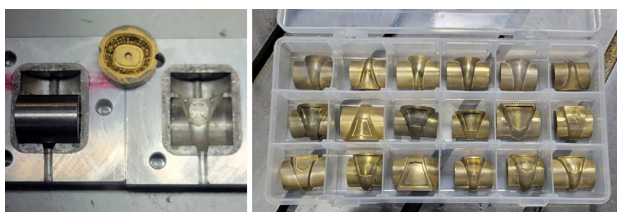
Pressed metal mold with CNC milled brass inserts for top (left). Many different ring shank profiles, CNC milled for class rings (right). These would be pressed into the soft metal molds. Jewel Craft, Inc. Erlanger, Kentucky
